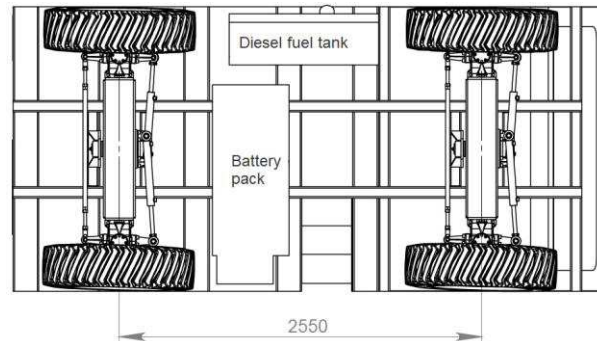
Bottom view with the front and rear axles and steering mechanisms
